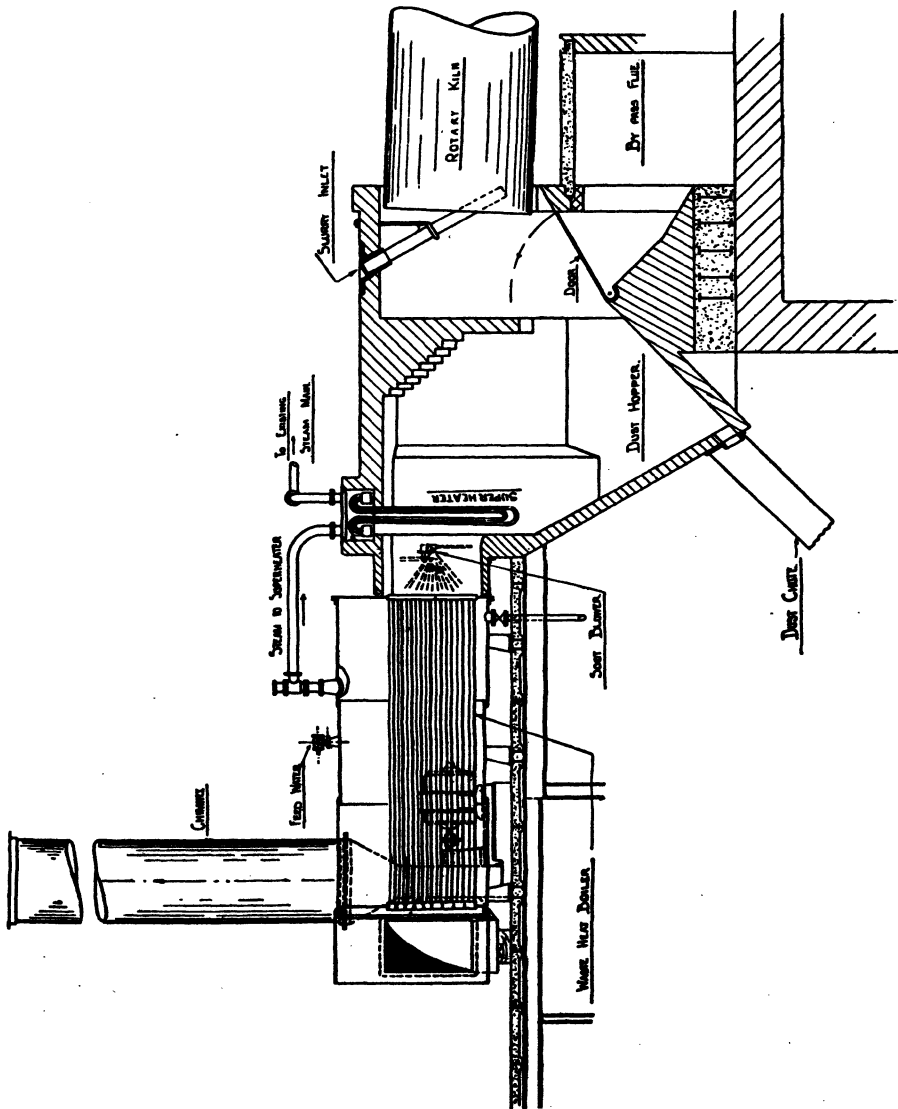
Sectional View of Gas-tube Waste-Heat Boiler.
